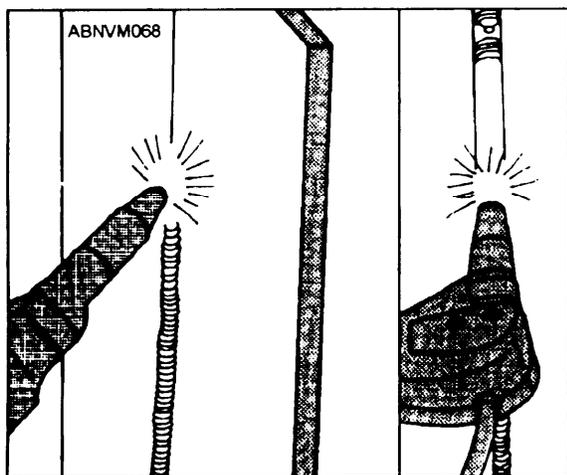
Welding fillet and butt joints in the vertical position.
